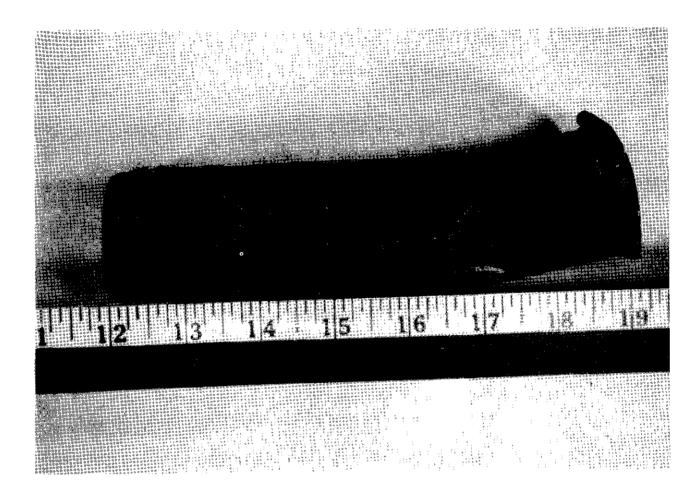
Center pin remnant removed from truck bolster of EJ&E 4712. Fracture face mushroomed by battering from upper remnant over a prolonged period.
